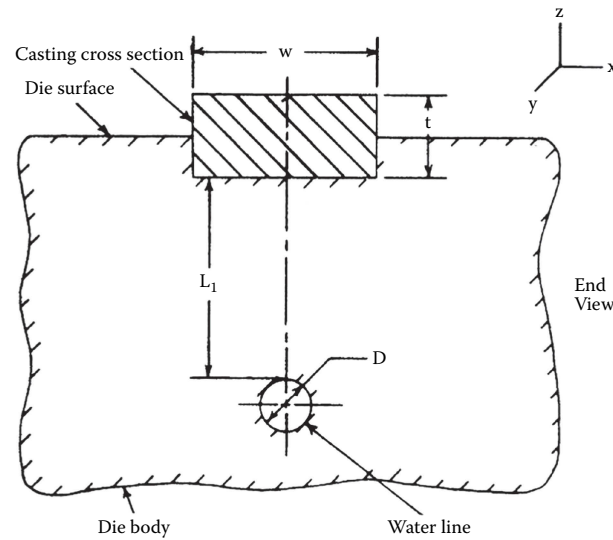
Water-line configuration used in a die section that produces a casting in the shape of a strip of infinite length (case 2). Only one-half of the die assembly is shown
